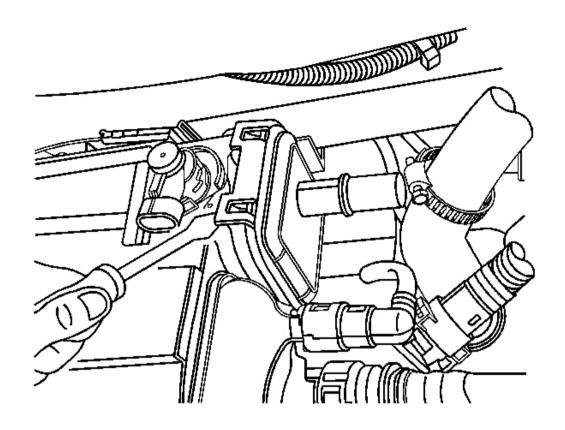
View Of Evaporative Emission (EVAP) Canister Filter Courtesy of GENERAL MOTORS CORP.
